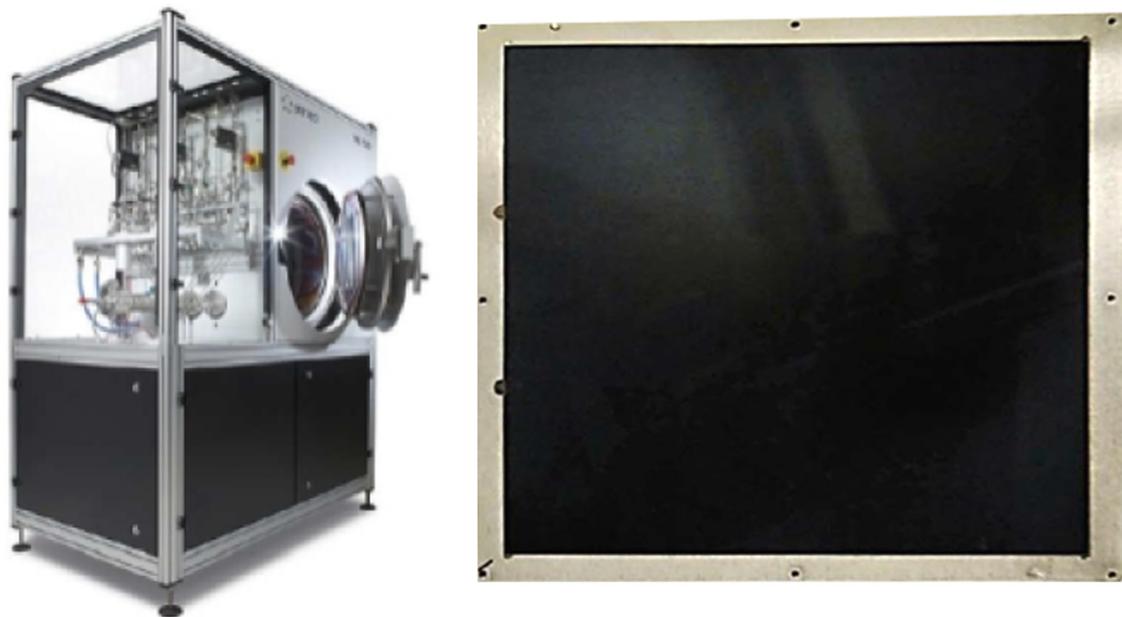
(Left) Beneq ALD Coater, (right) fully coated MCP with resistive and emissive coatings, framed by a measurement and test fixture.
